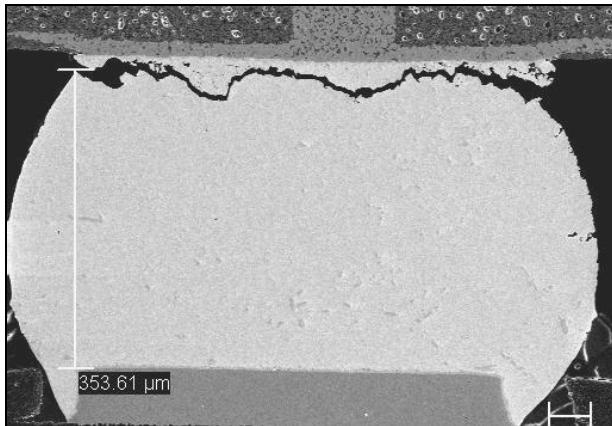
Cross Section of Solder Joint Fracture
